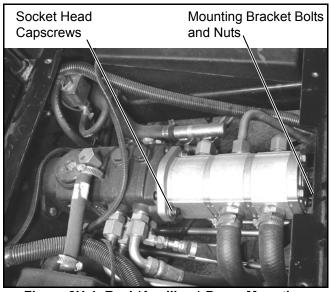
H-1. Reel (Auxiliary) Pump Mounting
